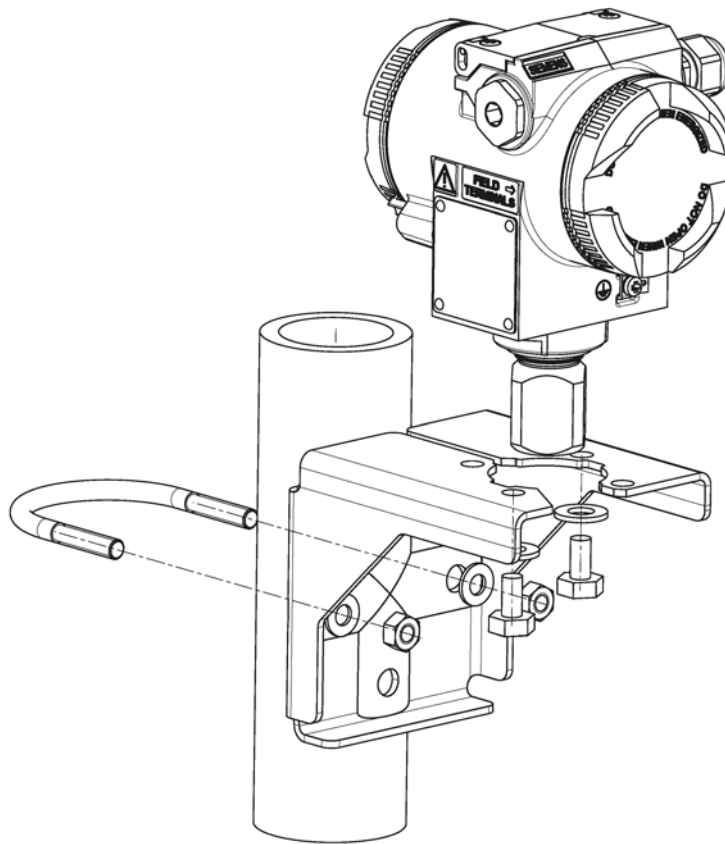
Fastening the pressure transmitter on the mounting bracket
